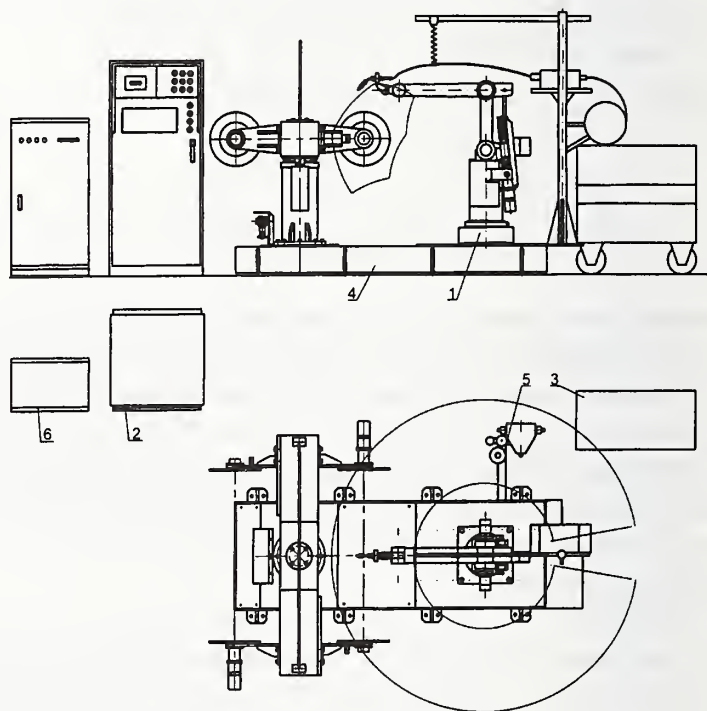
Typical robotic MIG/MAG welding arrangement:
